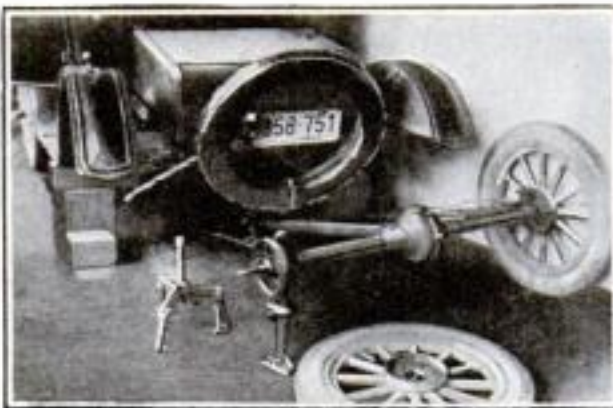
How the car should be blocked so as to allow the rear axle to be moved to the rear
